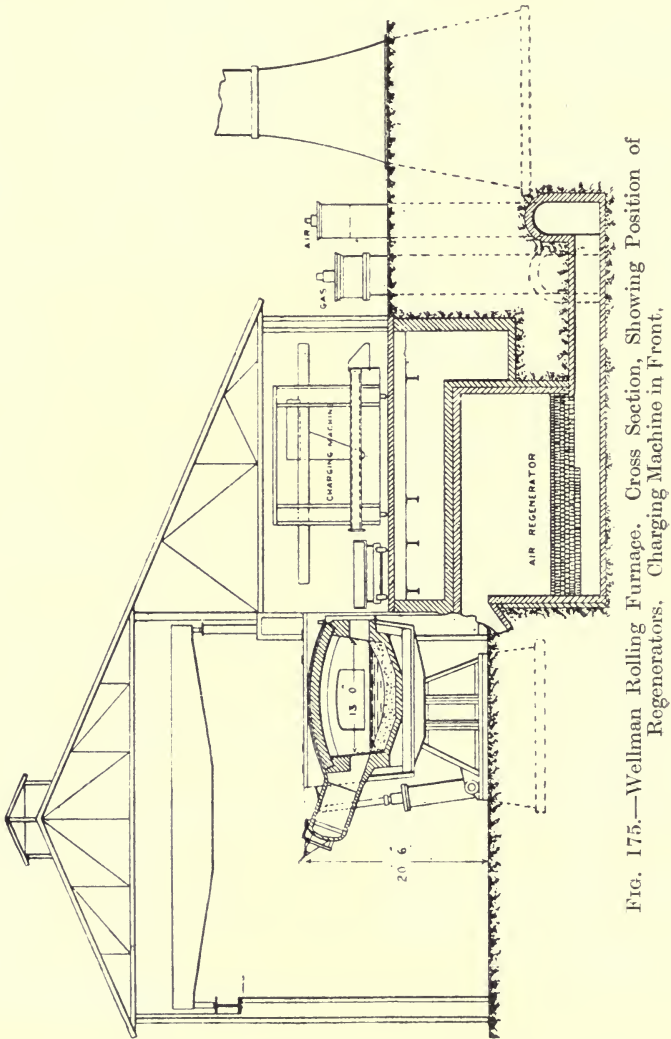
Wellman Rolling Furnace. Cross Section, Showing Position of Regenerators, Charging Machine in Front.
